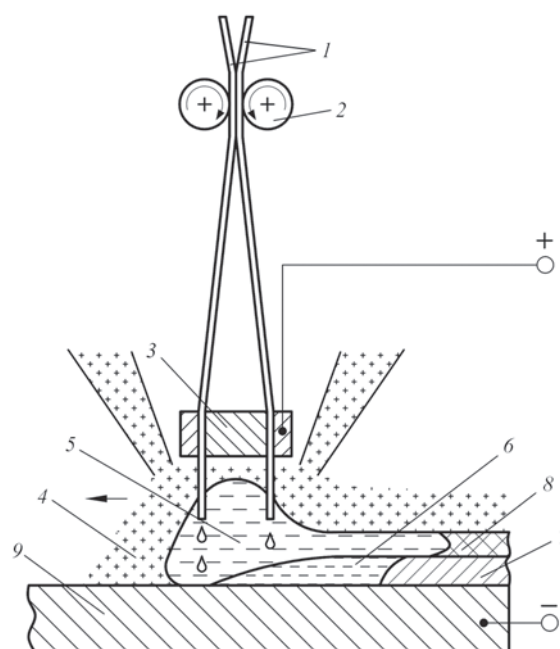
Scheme of electroslag surfacing by two strips [4]: 1 — electrode strips; 2 — feeding rollers; 3 — copper insert-current conductor; 4 — flux; 5 — slag pool; 6 — metal pool; 7 — deposited metal; 8 — slag crust; 9 — workpiece being deposited
